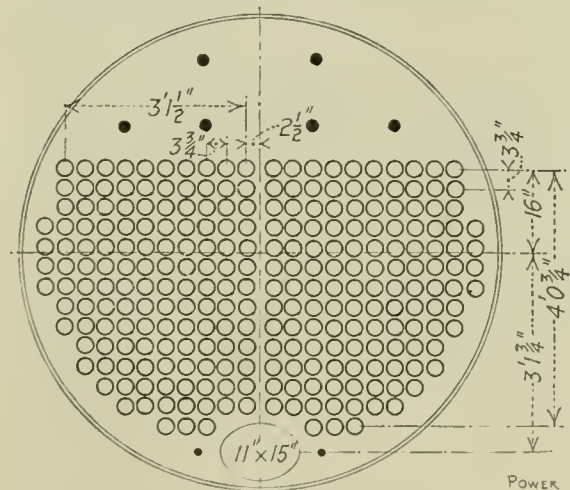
TUBE LAYOUT FOR 90-INCH HORIZONTAL TUBULAR BOILER
